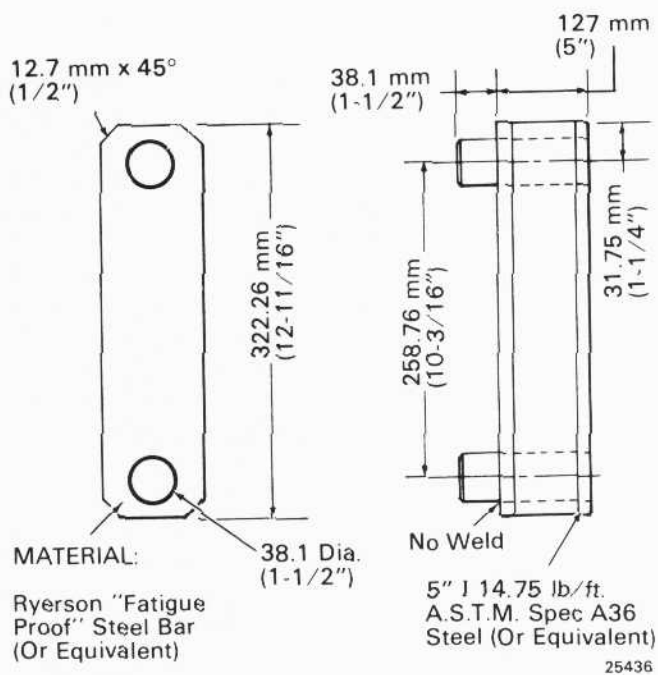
NC-390 Or NC-391 Assembly Clamp
